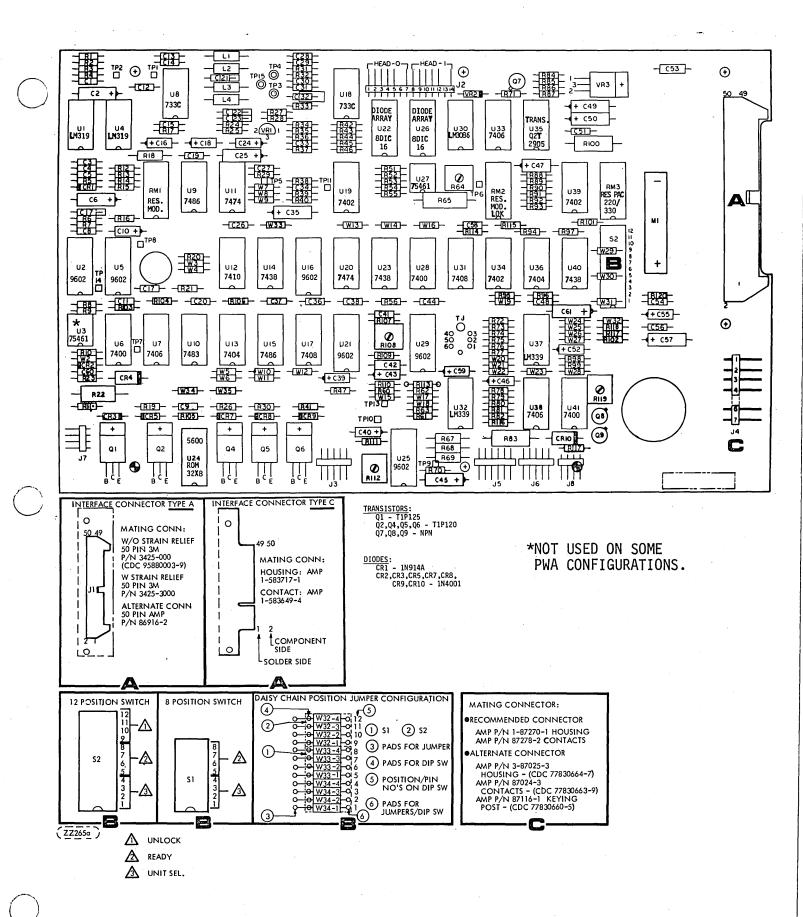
ASSEMBLY AND PARTS LIST (SHEET 1 OF 5)
